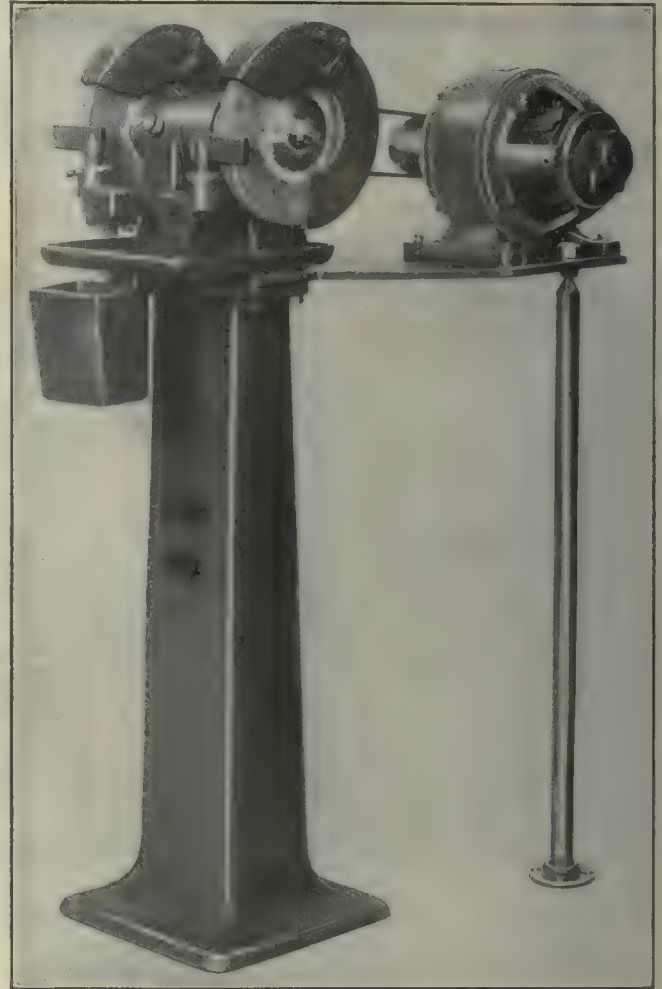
TOOL GRINDER WITH 9 x 3-IN. WHEELS
